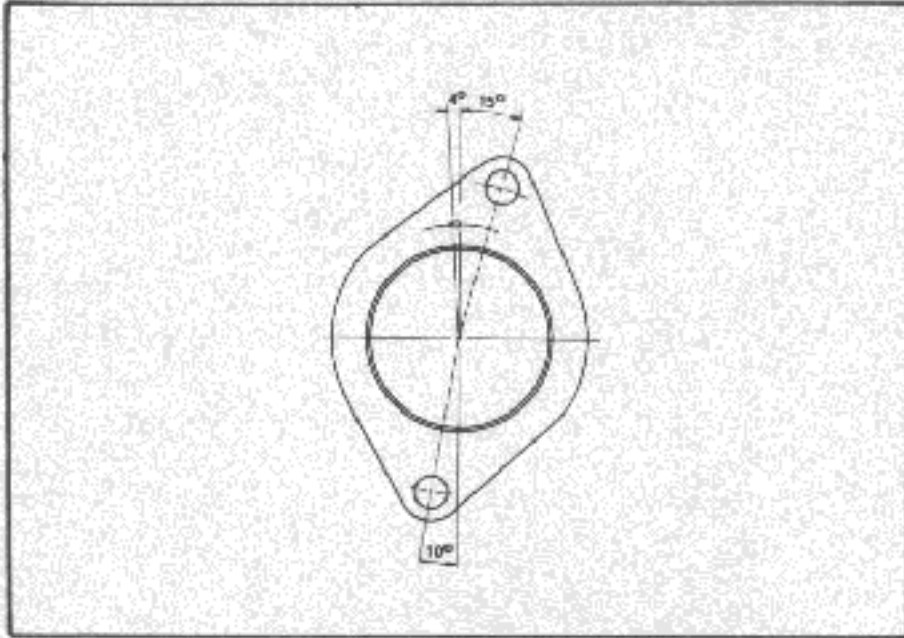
Camshaft locate plate (L13 and L16 engine)
